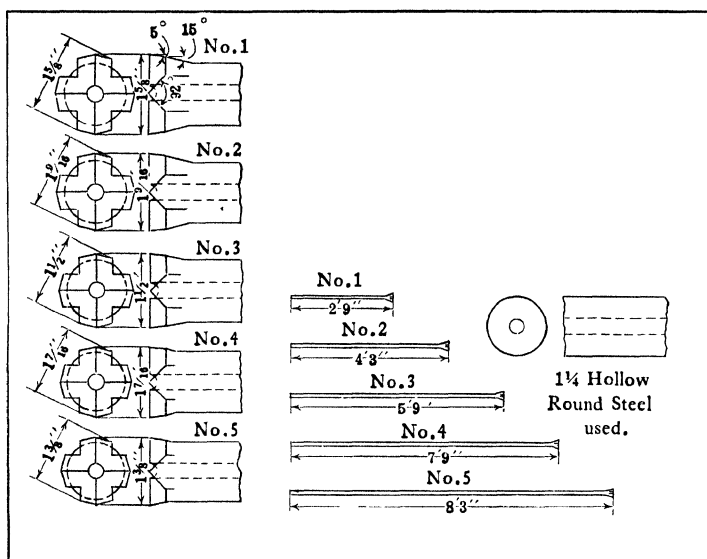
DRILL STEEL FOR DRIFTS AND CROSSCUTS, SHOWING DRILL LENGTHS AND BITS USED.
